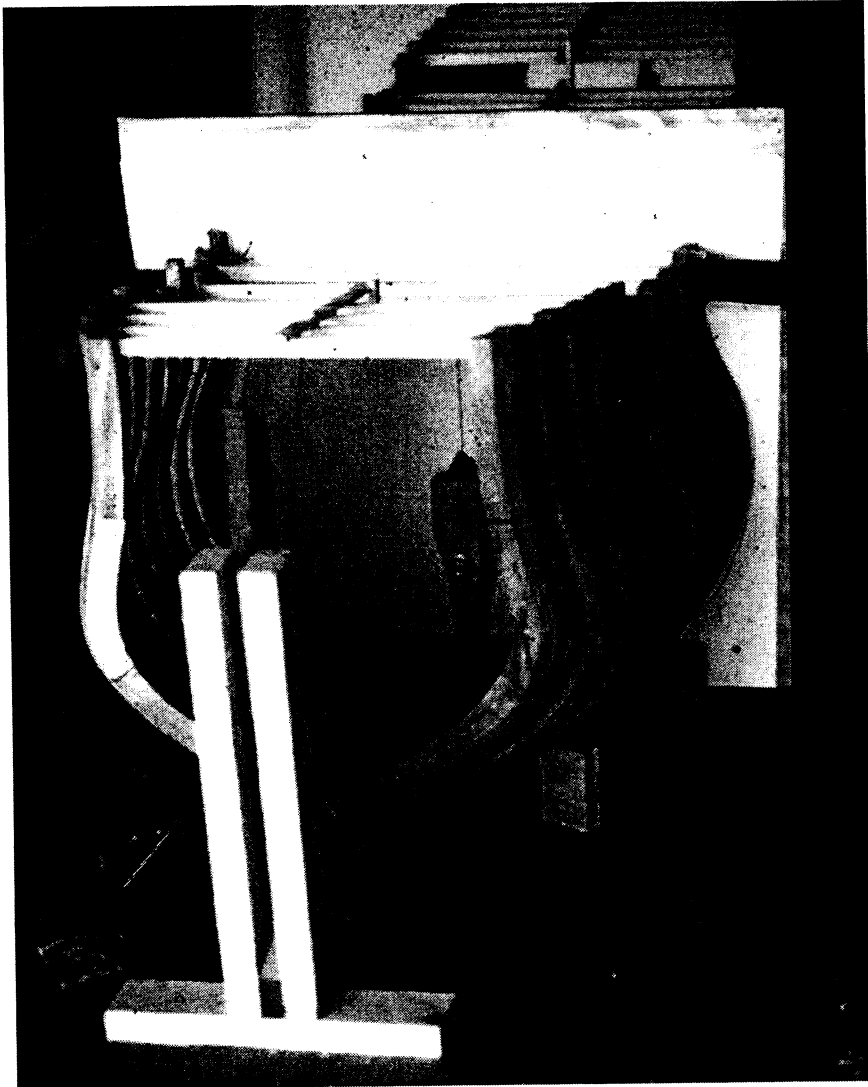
The nearly complete frame model with frame jig in place showing the method of properly positioning the frames. Photo by G. Grieco.
